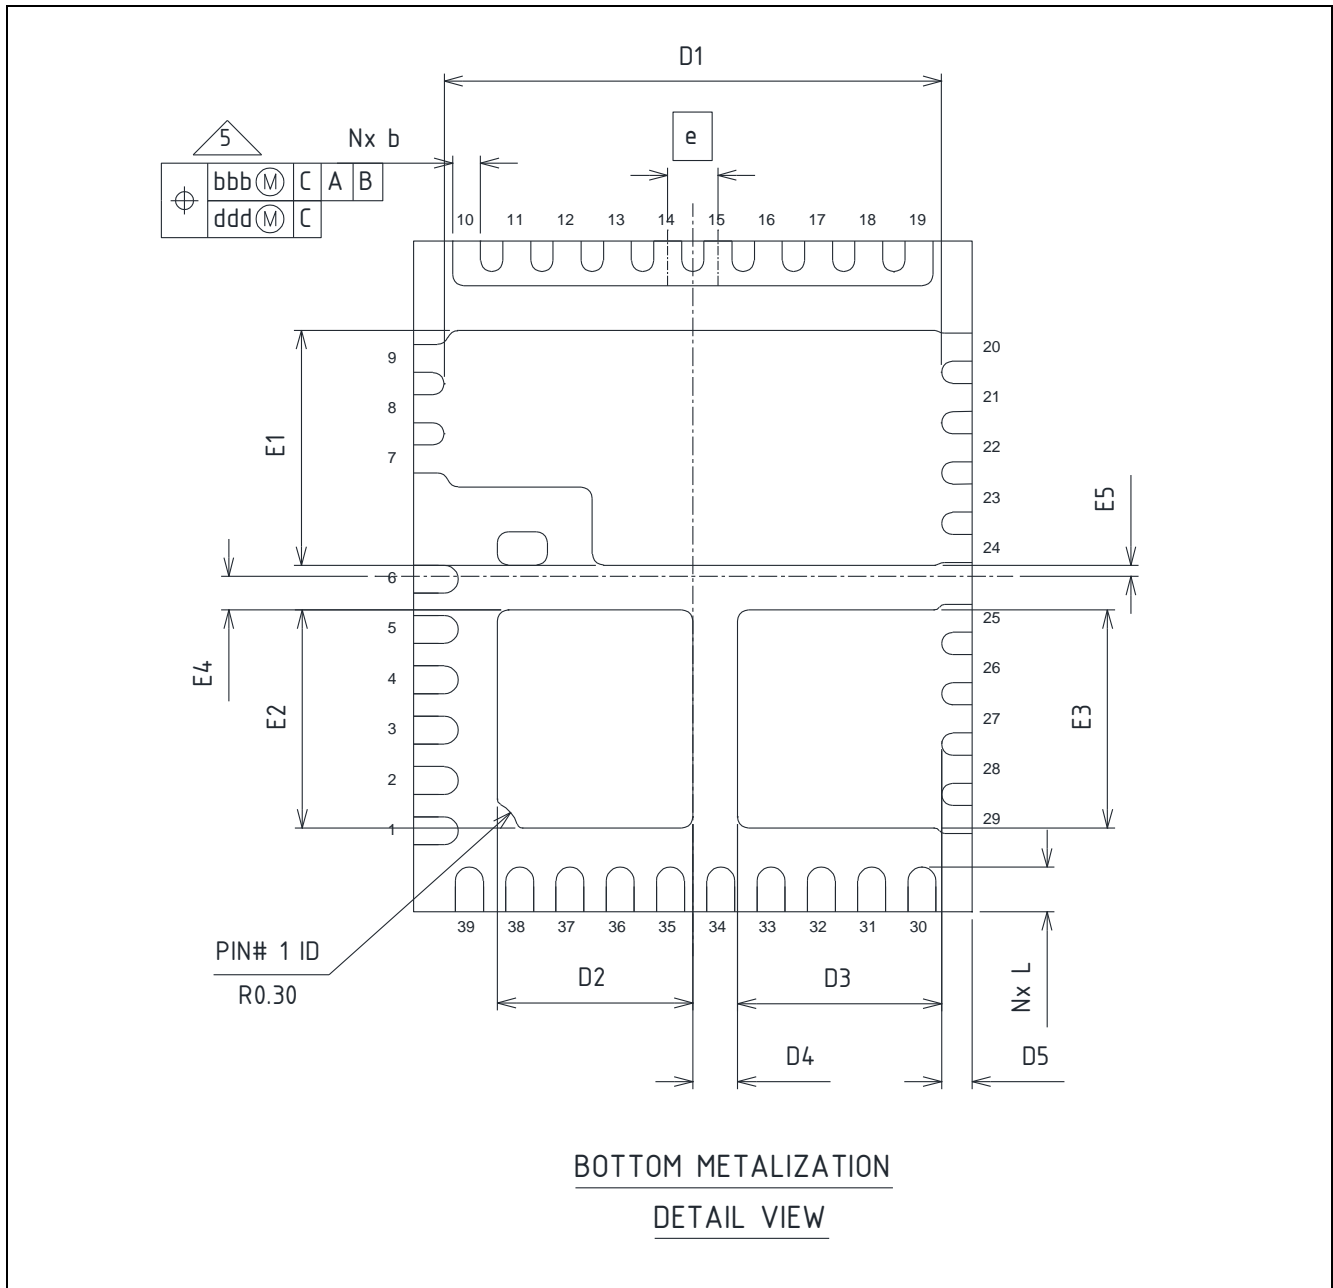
Mechanical Dimensions of Package (Bottom View) in mm
